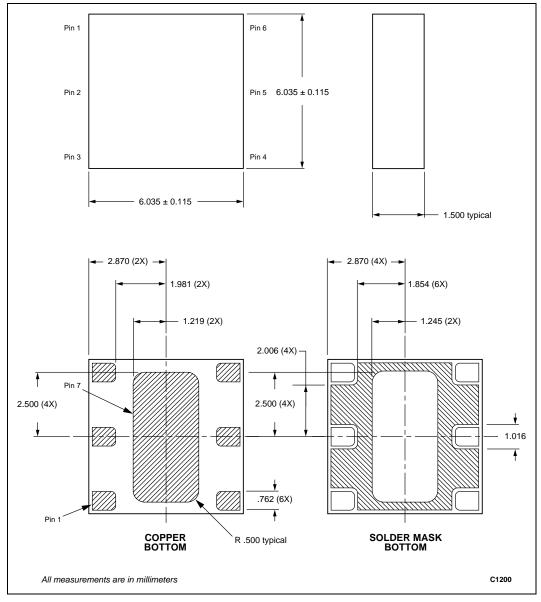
CX65102 6-Pin LCC Package Dimension Drawing
